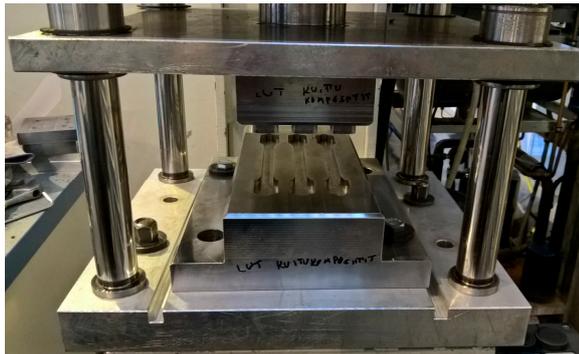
A tool constructed for the compression molding of tensile strength samples.
